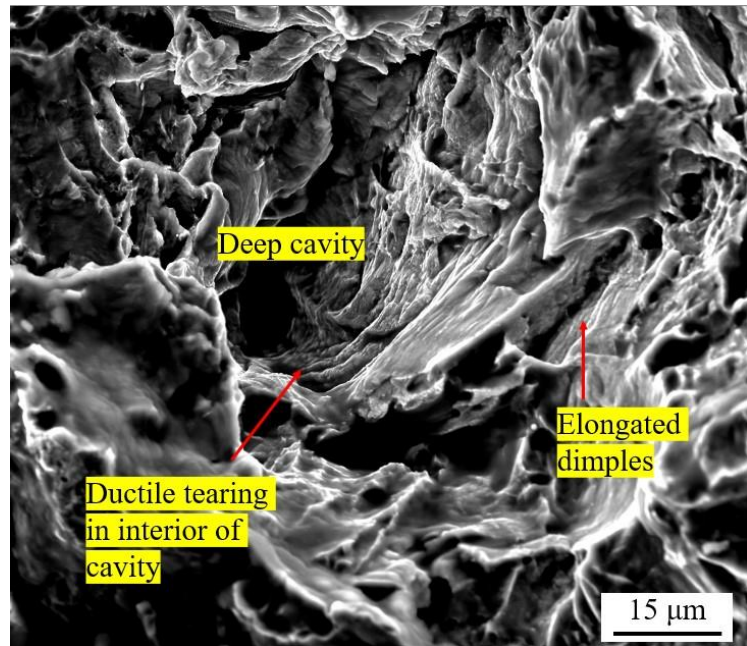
Fractography of fracture face on zig-zag crack.
